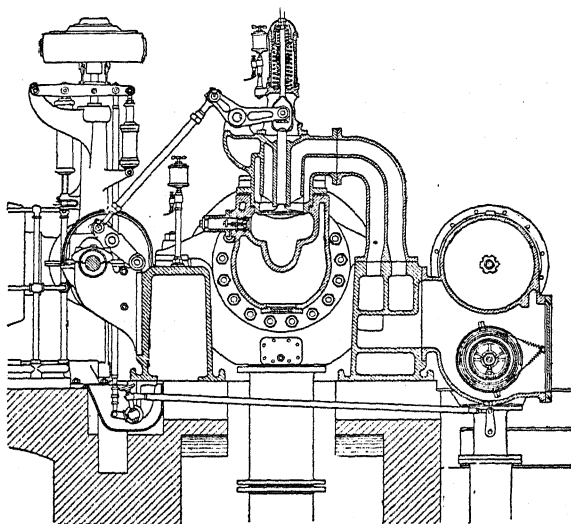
CROSS-SECTION OF A 400-H.P. KÖRTING ENGINE BY KÖRTING BROTHERS, KÖRTINGSDORF.
